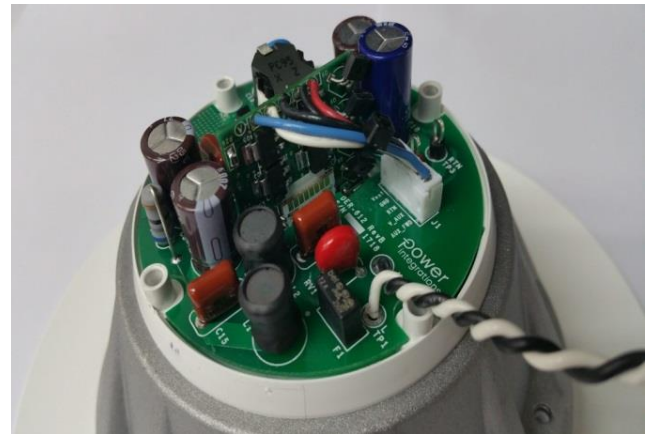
Main Driver and BLE Interface Boards Mounted on the Downlight Housing / Heat Sink.
